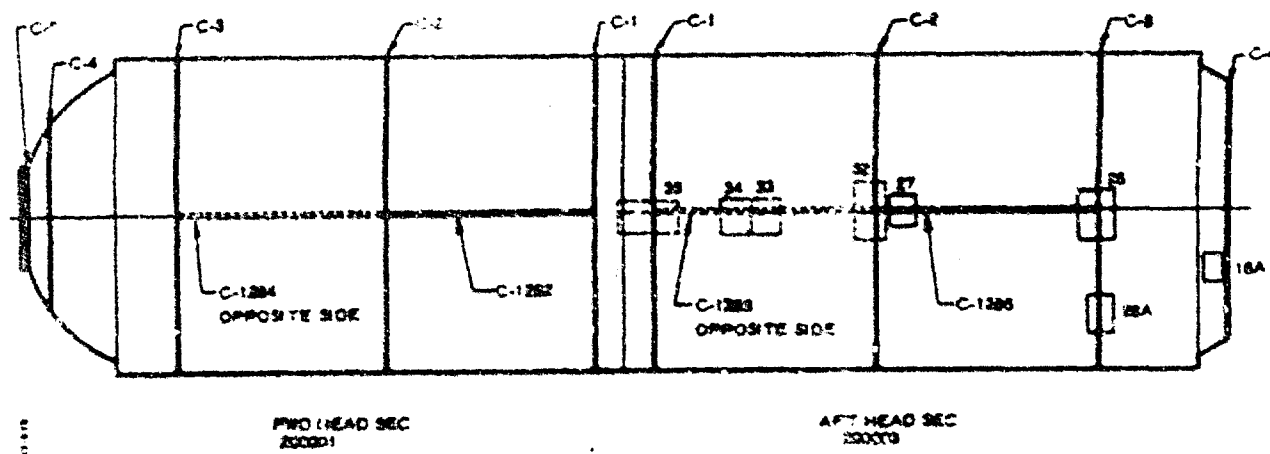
156-Inch Diameter Hydroburst Weld Identification and Test Plate Location (Post-Hydroburst)
